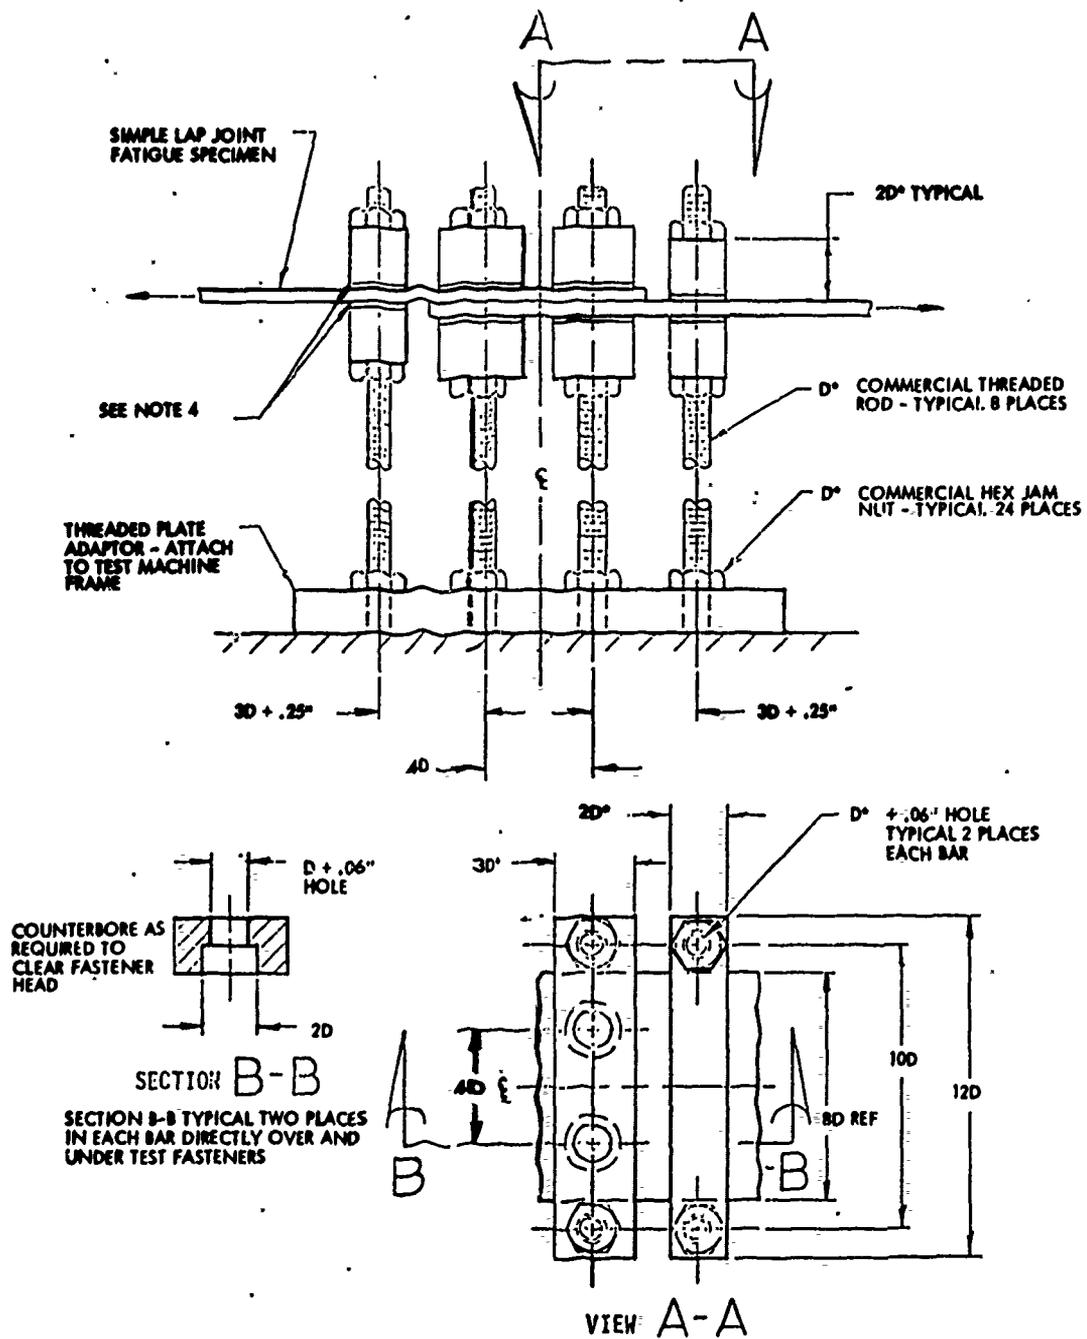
Illustration of Flexure Support Fixture Installed On Simple Lap Joint Specimen
